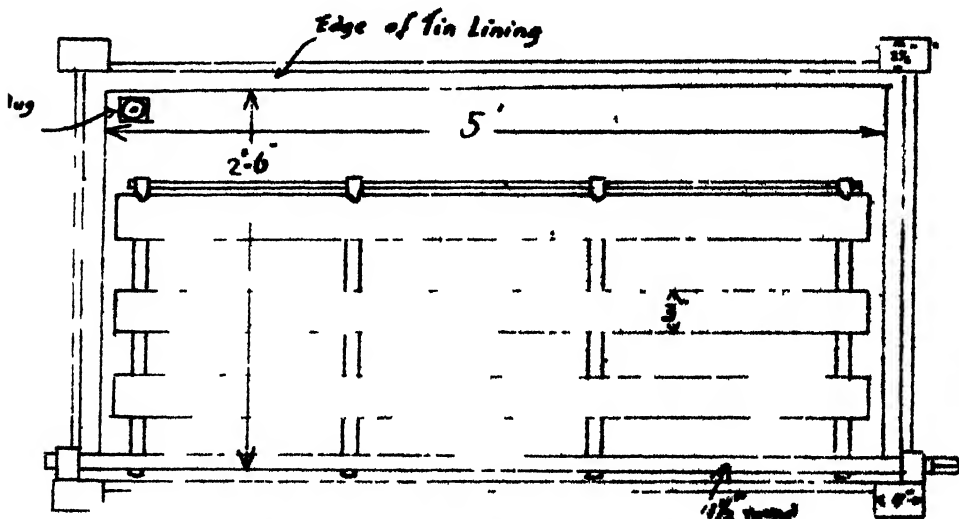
Top Elevation of the Pig-scalding Vat at Hawkesbury Agricultural College.
